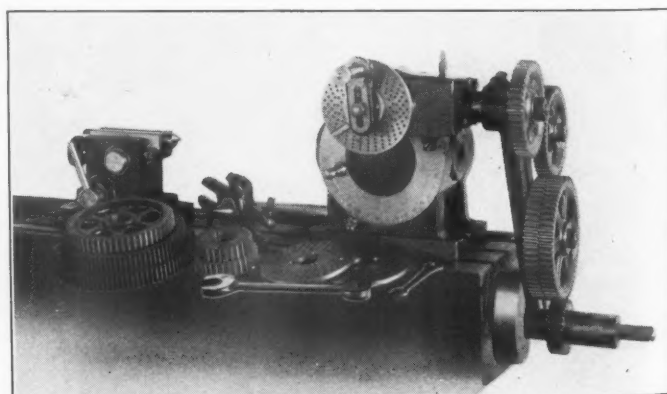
Universal Index Center With Spiral Cutting Attachment
